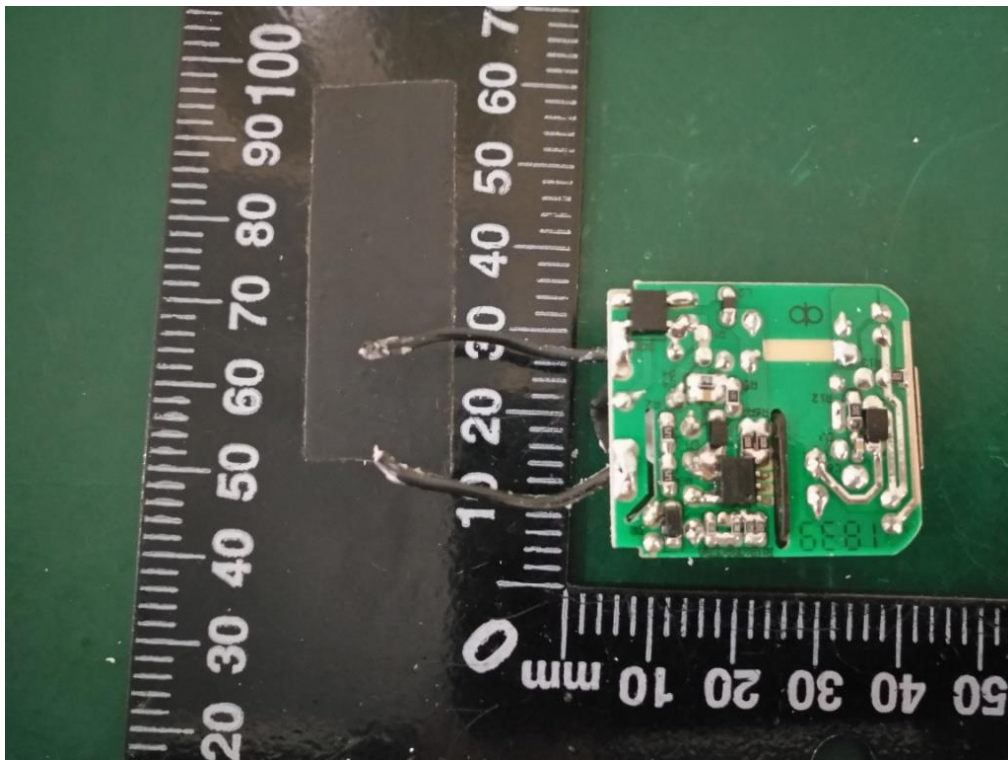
Bottom view of PCB (for model GLHXXXYYYYZ and GLHXXXYYYYZ)
